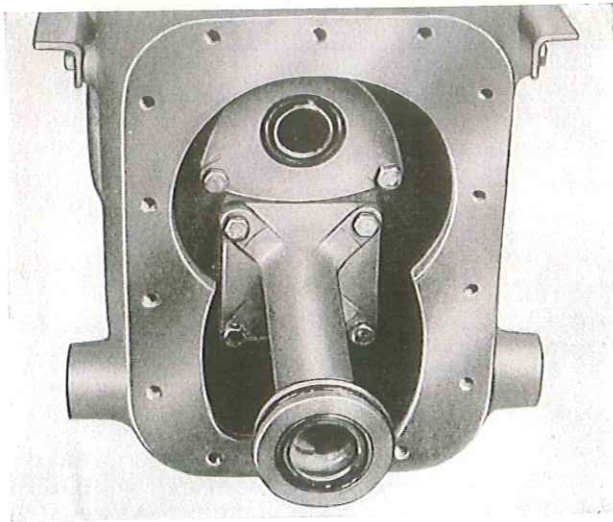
Transmission case with the P.T.-O. drive shaft sleeve.
